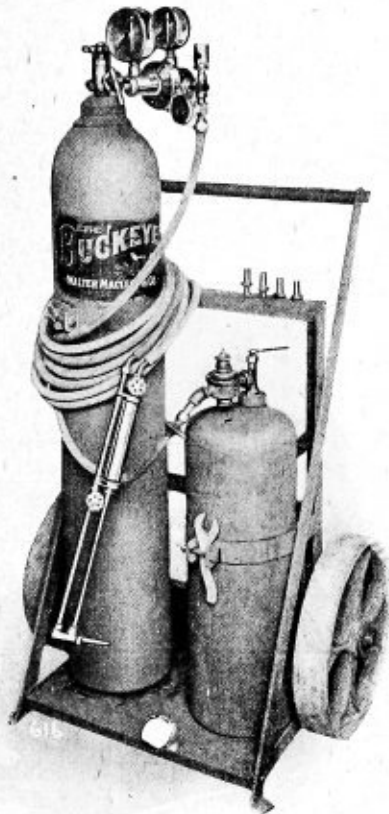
Portable Buckeye Oxy-Acetylene Welding and Cutting Apparatus
